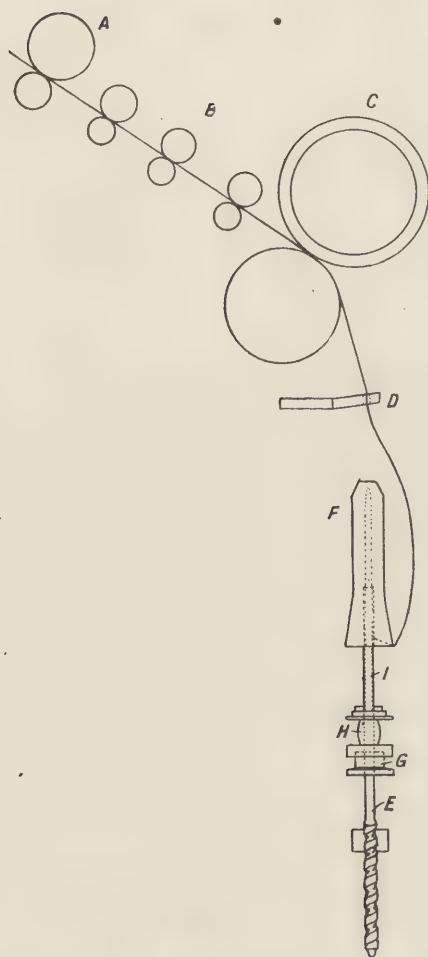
Cap Spinning Frame.—*A*, back rollers; *B*, carriers; *C*, front rollers; *D*, eyelet board; *E*, spindle fixed in framework; *F*, cap supported by spindle; *G*, bearing for tube *I*; *H*, whar round which driving tape passes; *I*, tube upon which bobbin or spool is fixed and carried round.
